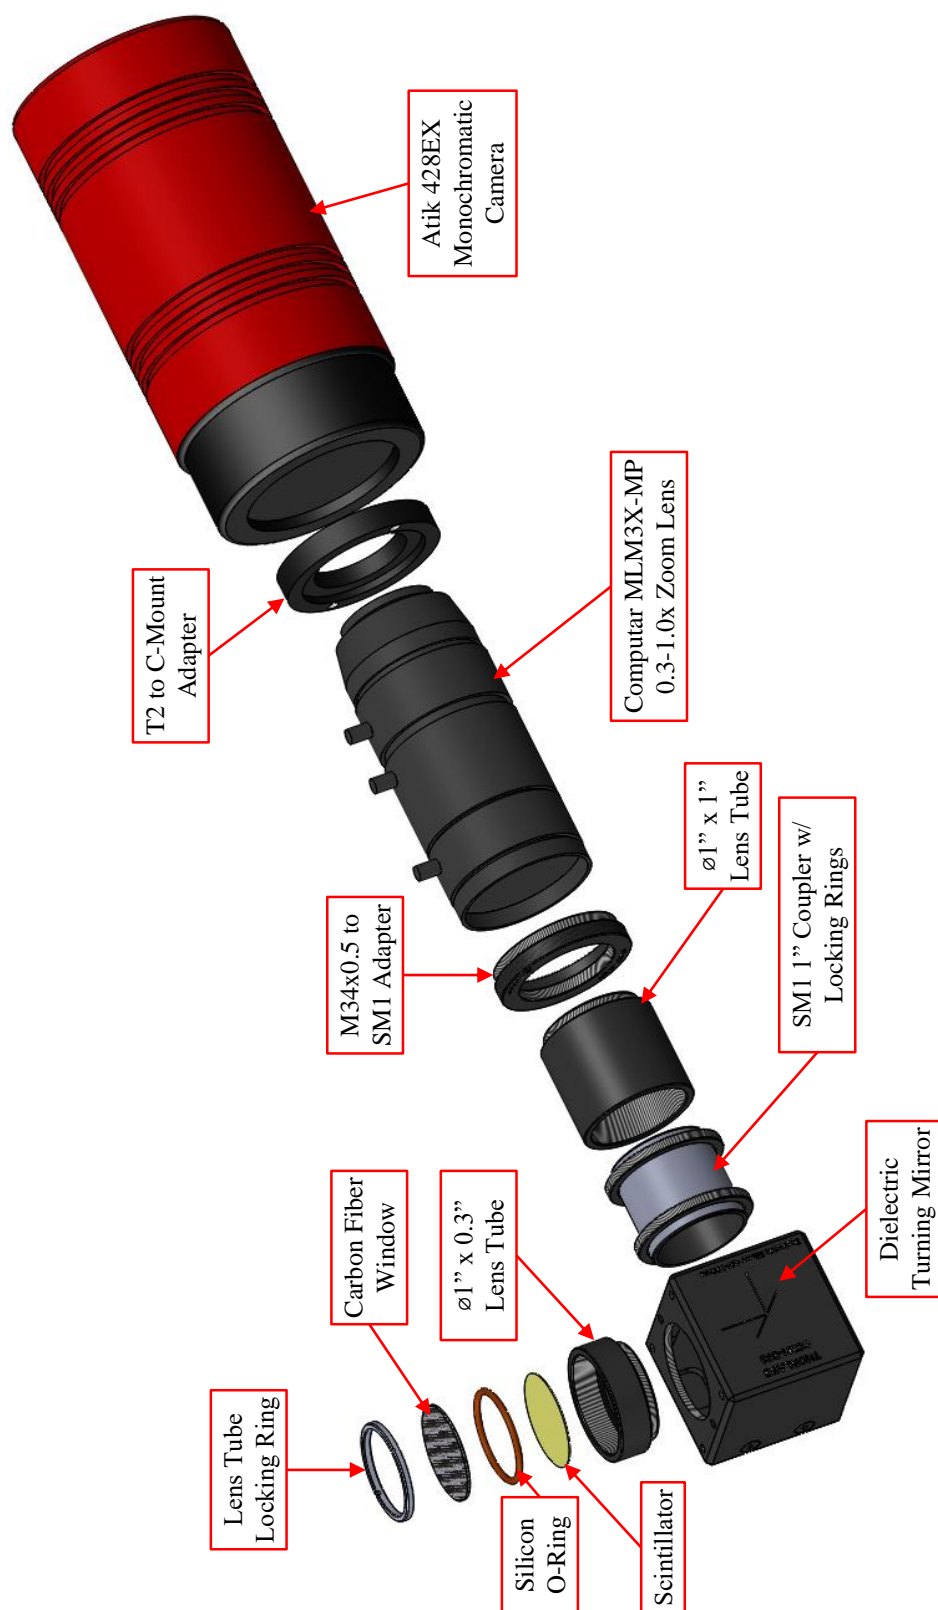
Exploded solid model of the periscope X-ray camera.
